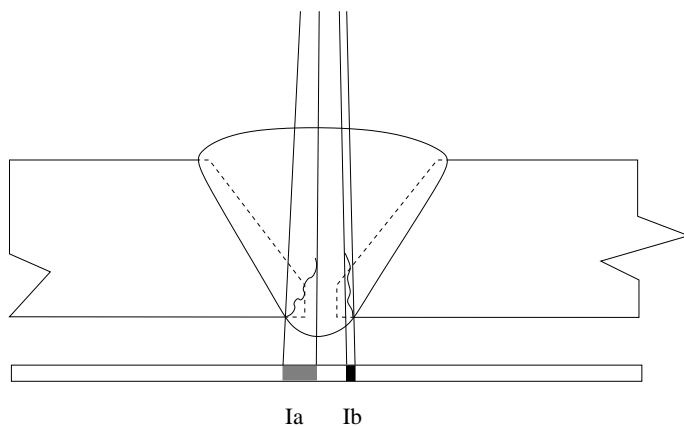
Schematic cracks in a welding seam and their indications.
